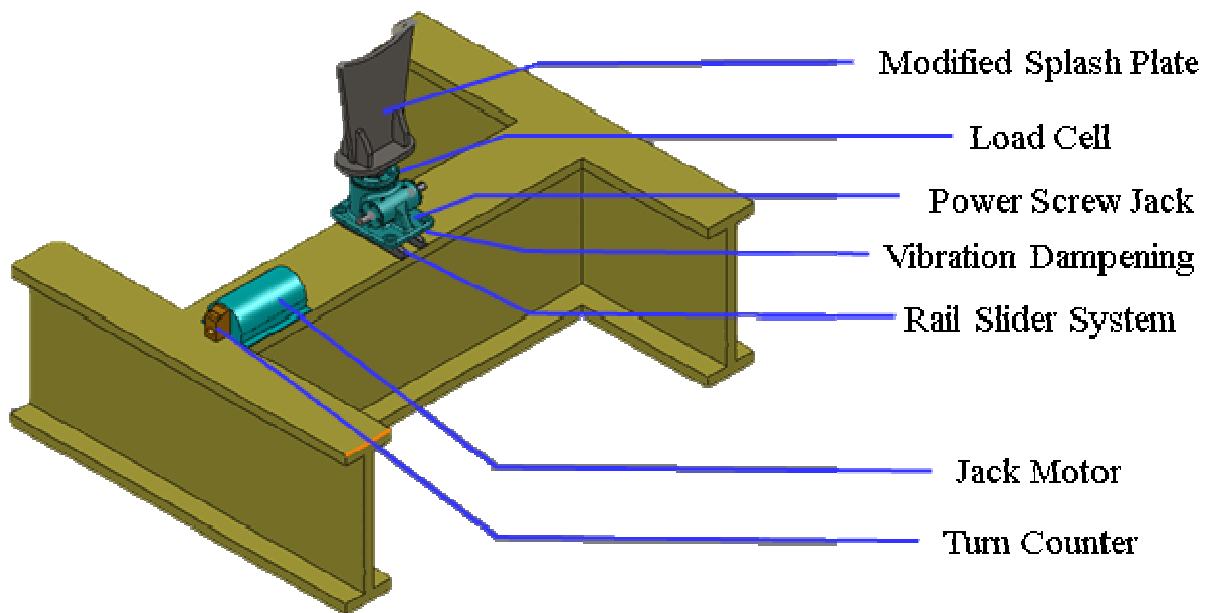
Mechanical concept design layout showing the motor and turn counter pushed away from the jack for clarity.
